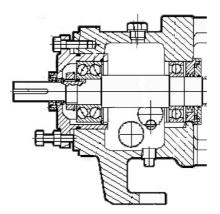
A bearing Assembly – Outboard Bearing is the Locating Bearing
